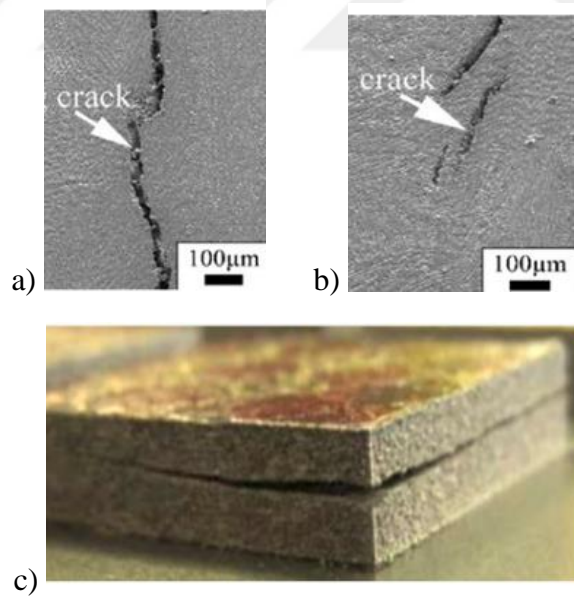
Cracking (a & b) and delamination (c) in additive manufacturing.
